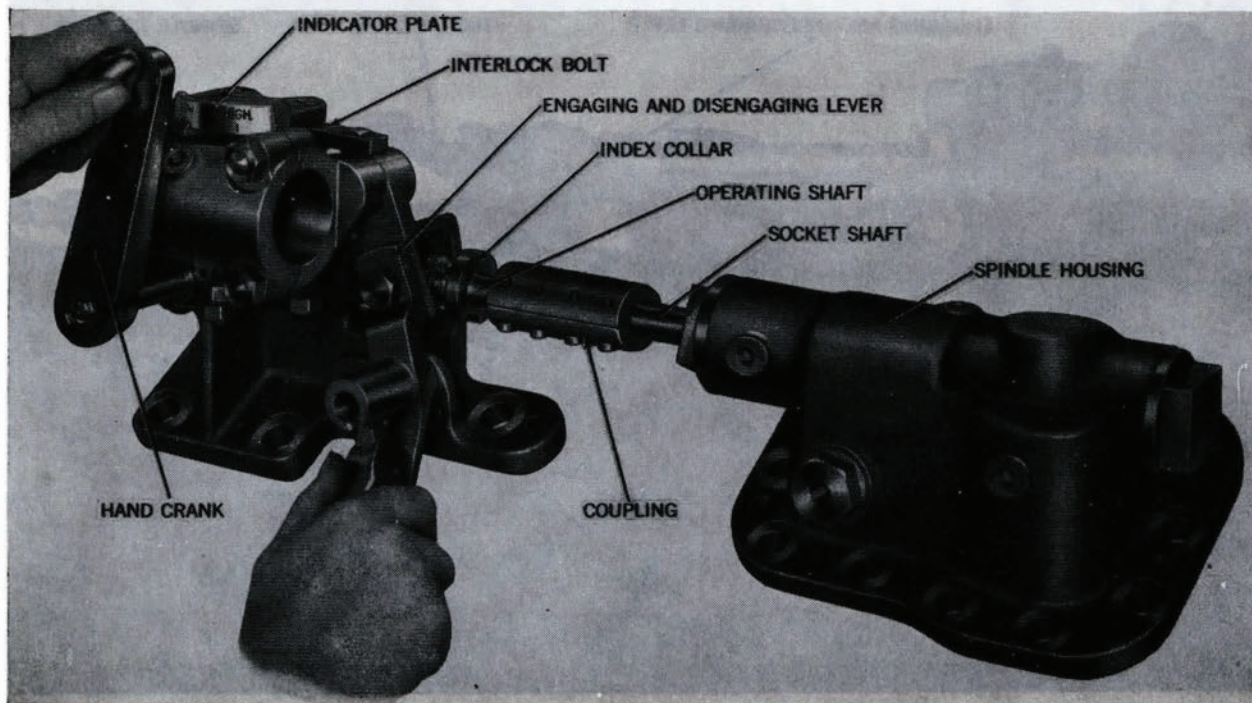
Simple Type Speed Setting Mechanism—Spindle IN—Hand Crank at LOW.
